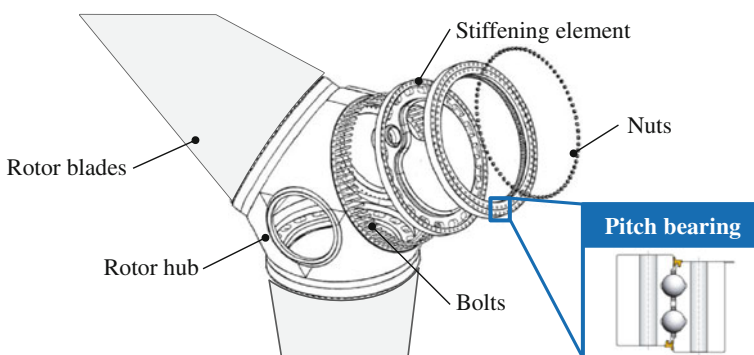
Assembly of the pitch bearing between the rotor hub and the rotor blade (Image Sources [5, 6])
